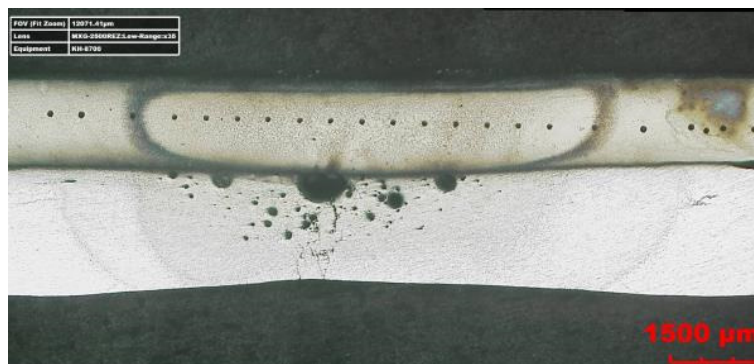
Resistance spot weld with process tape of aluminium to steel (Source: KULeuven)
